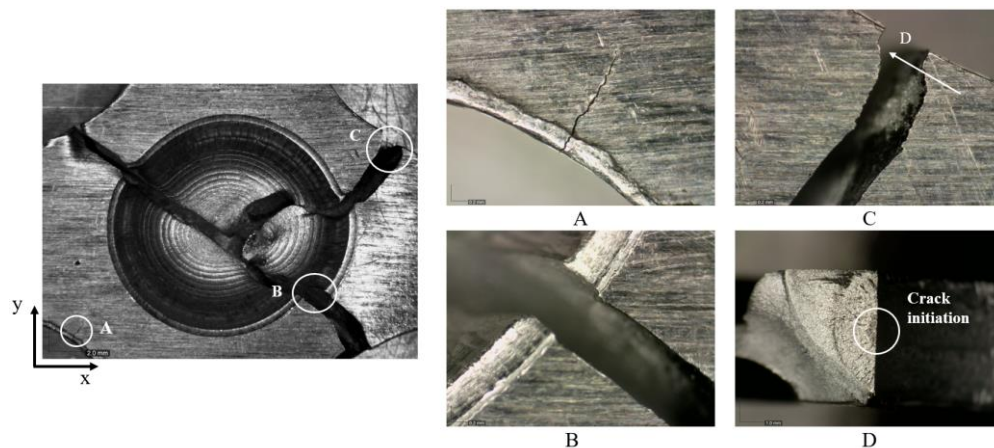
PM only F2 T-T Fatigue fractured F2 T-T: (A) fractures locations; (B) corner fracture; (C) and (D) fracture at the front surface.
